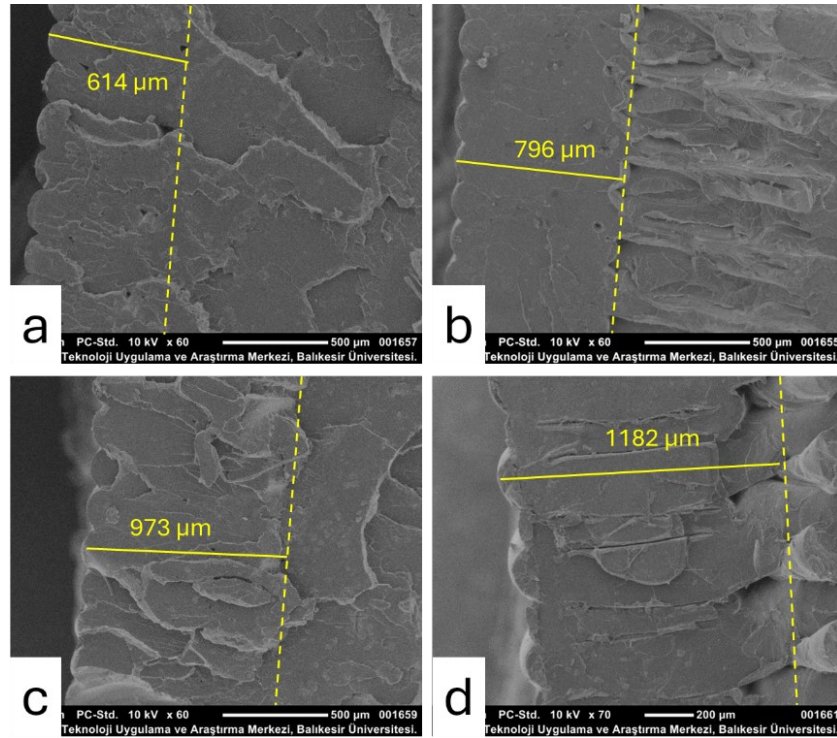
Tensile fracture surface of specimens printed with line-width values of a) 0.6 mm, b) 0.8 mm, c) 1.0 mm and d) 1.2 mm.
